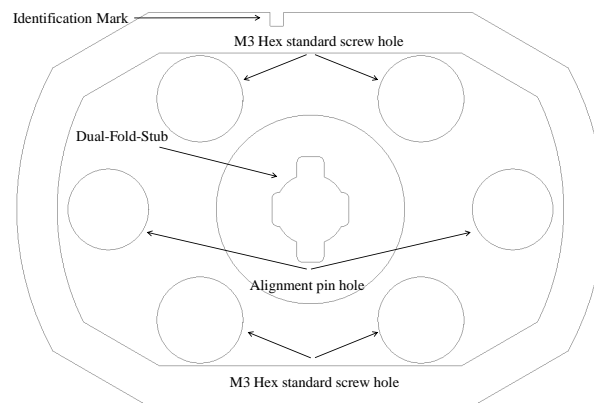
Mechanical design of plate 2 of the DFS polarizer. Identification mark, holes for M3 hex screw, alignment pins and the Dual-Fold-Stub (DFS) are marked by arrows.
